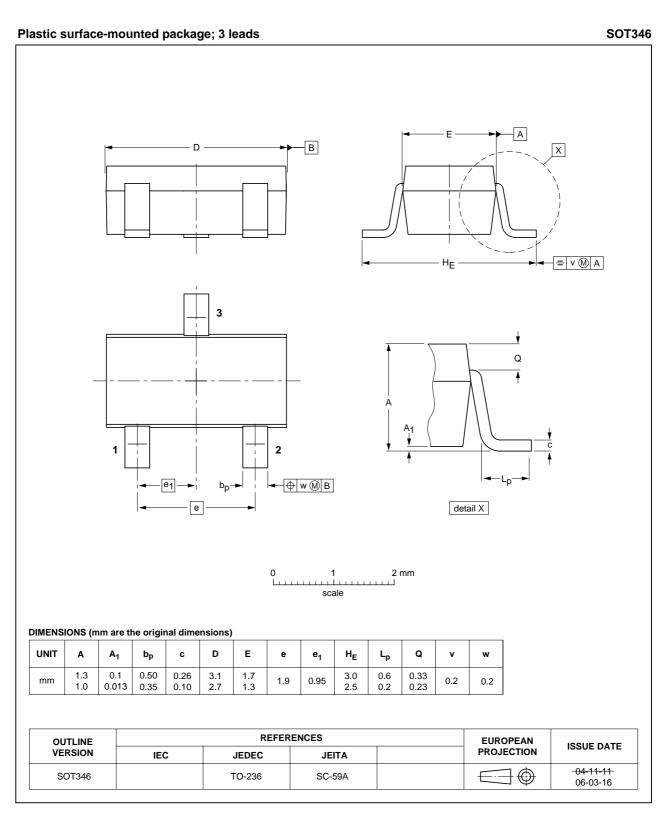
Package outline SOT346 (SC-59A/TO-236)
